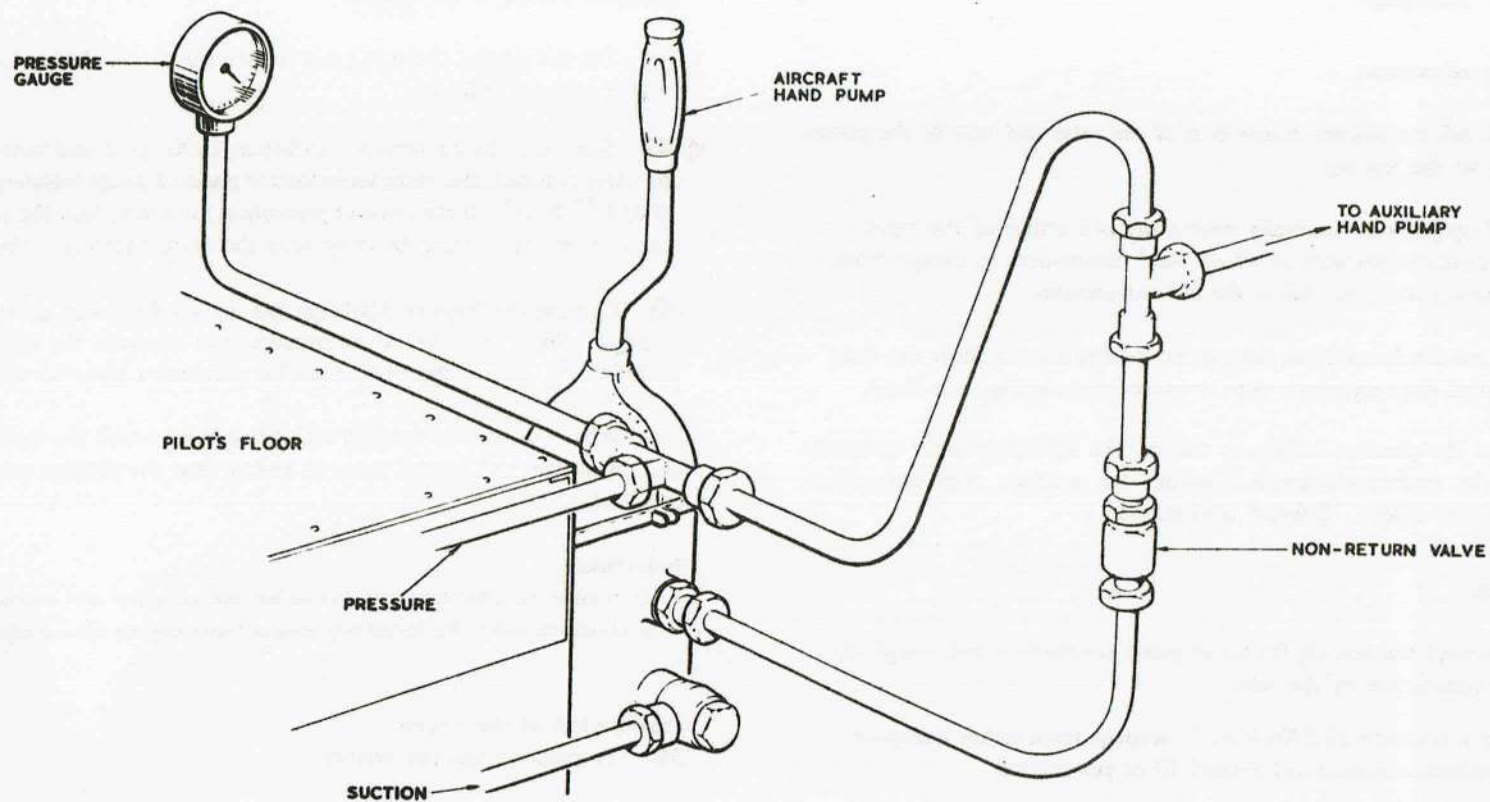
AUXILIARY HAND PUMP CIRCUIT
